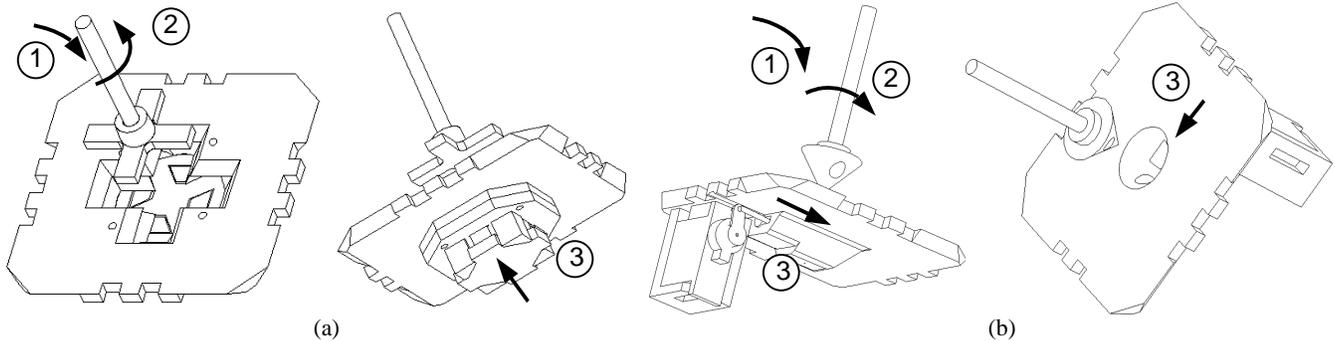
(a) Cross-shaped connector with twist and lock mechanism, and (b) cone-shaped connector with the sliding latching mechanism.
